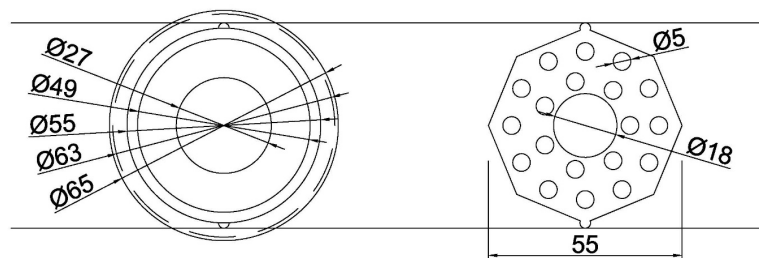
Socket and array plate dimensions of the strand specimens.
